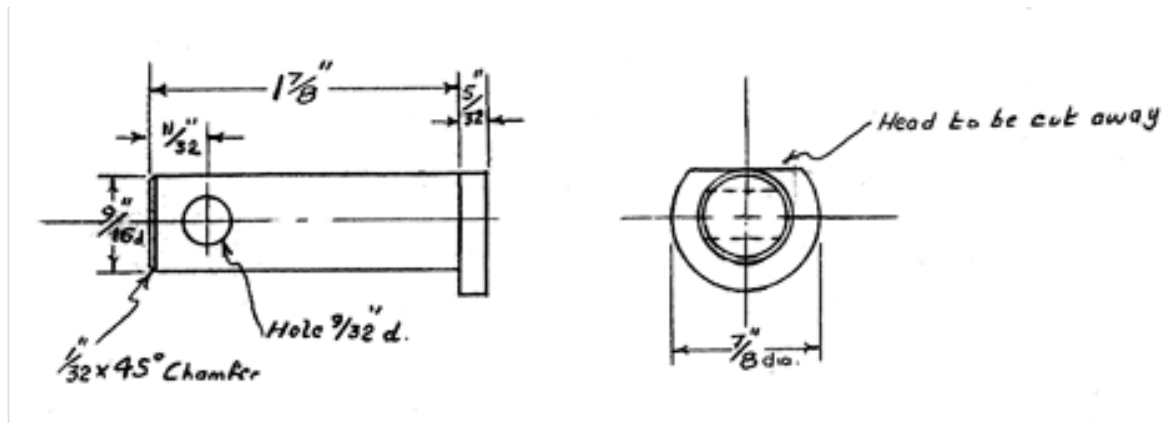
Clamp Locks: Mild Steel Pin for Securing Out of Use
